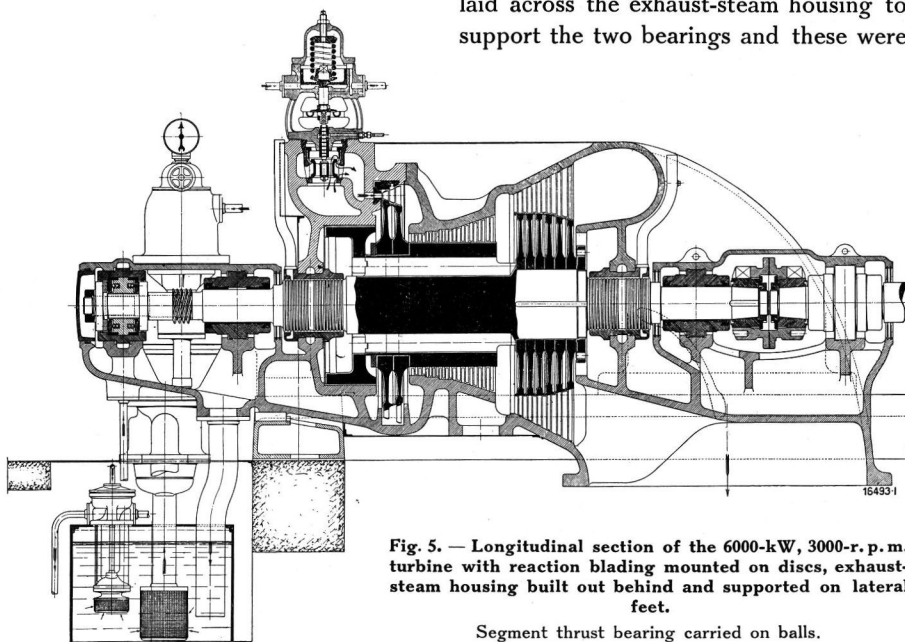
Longitudinal section of the 6000-kW, 3000-r.p.m. turbine with reaction blading mounted on discs, exhaust-steam housing built out behind and supported on lateral feet.
